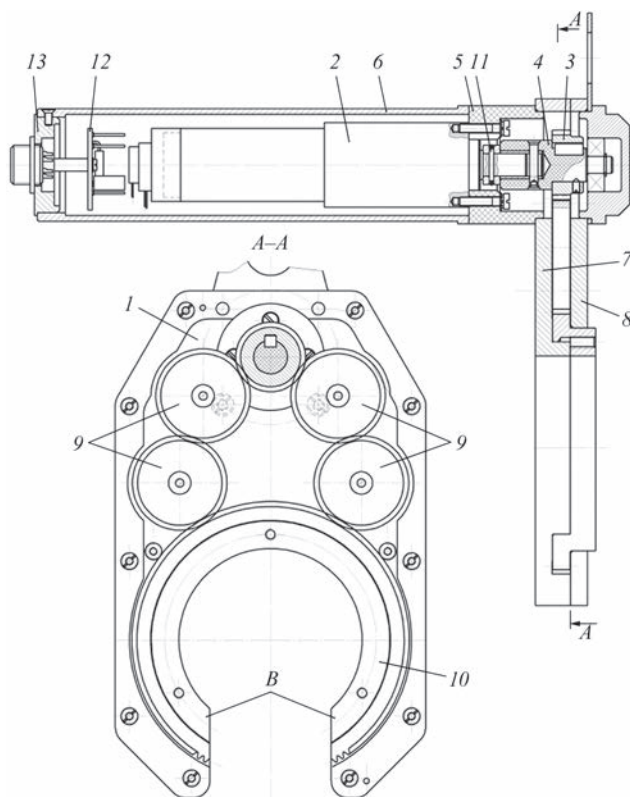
General view of rotator of all models of welding heads designed at the Scientific and Engineering Center of welding and control in the field of nuclear energy (on the side of their clamping mechanism (designations see in the text))
